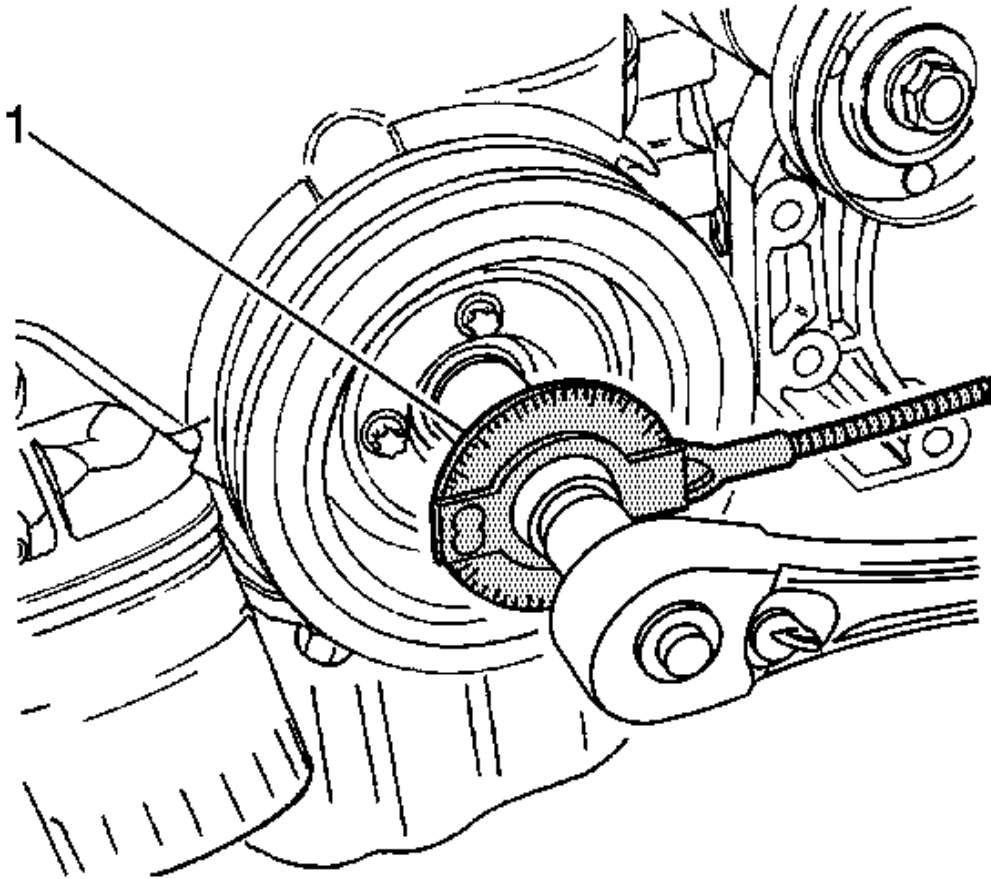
Tightening Crankshaft Gear Bolt With KM-470-B
